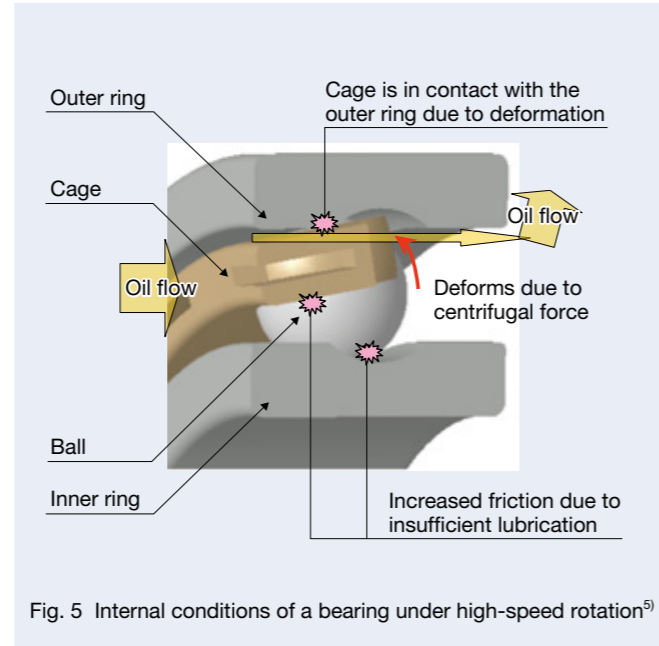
Internal conditions of a bearing under high-speed rotation⁵⁾
